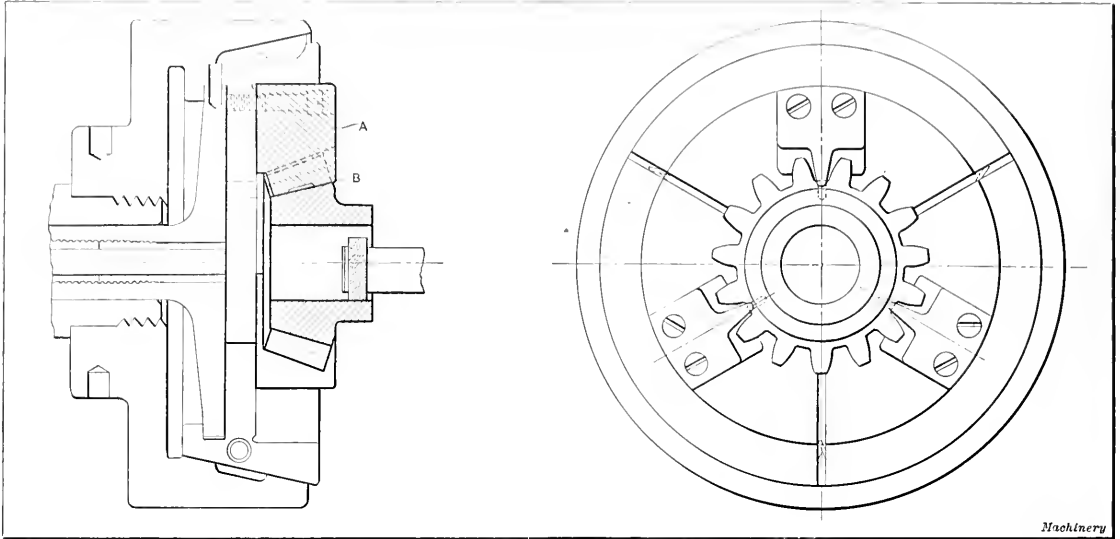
Bevel Gear Chuck with Jaws which engage Bottoms of Tooth Spaces
